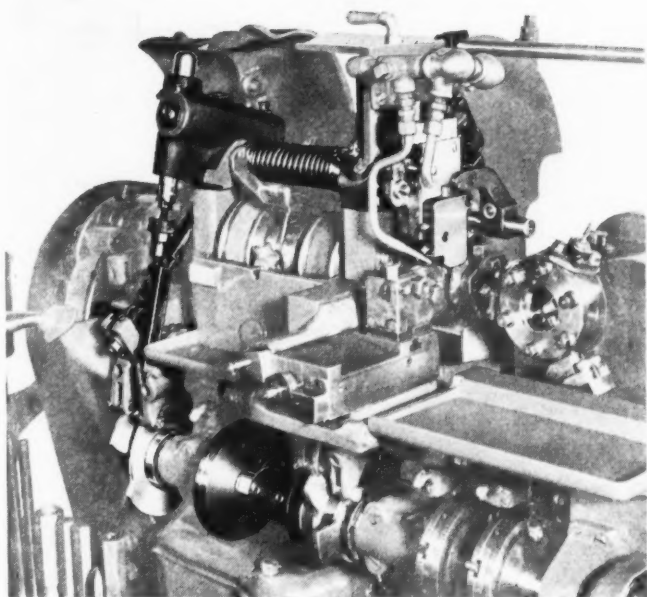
Longitudinal Turning Attachment Installed on B & S Automatic Screw Machine
